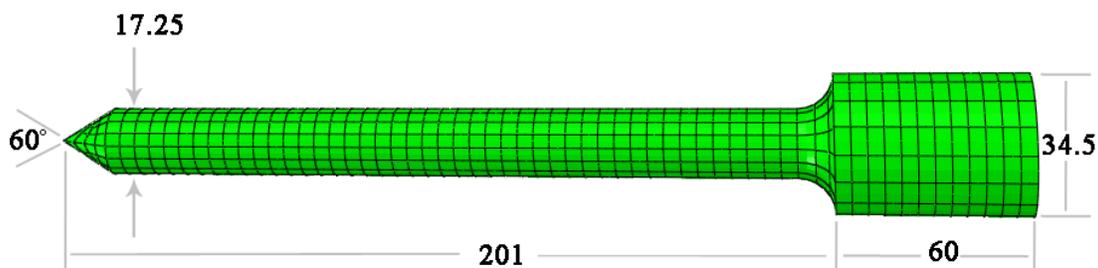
Size and shape of the ultrasonic penetrator used. Dimensions are given in mm.
